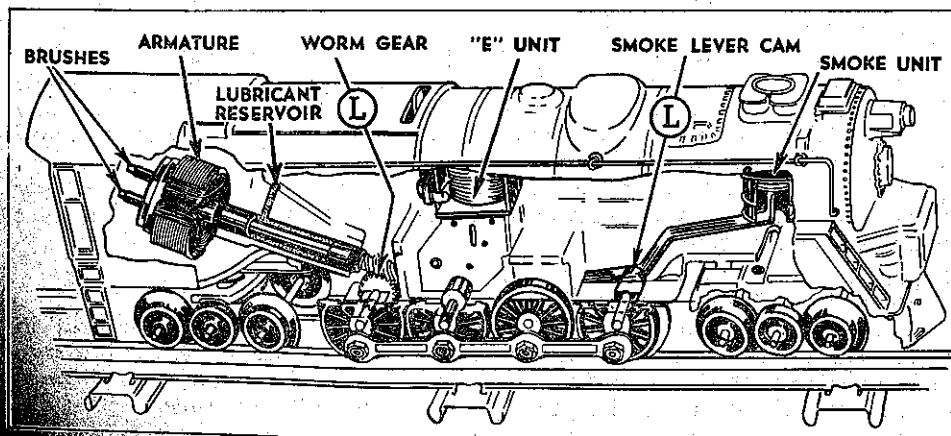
Cutaway View of No. 671 Locomotive Showing the Working Parts
